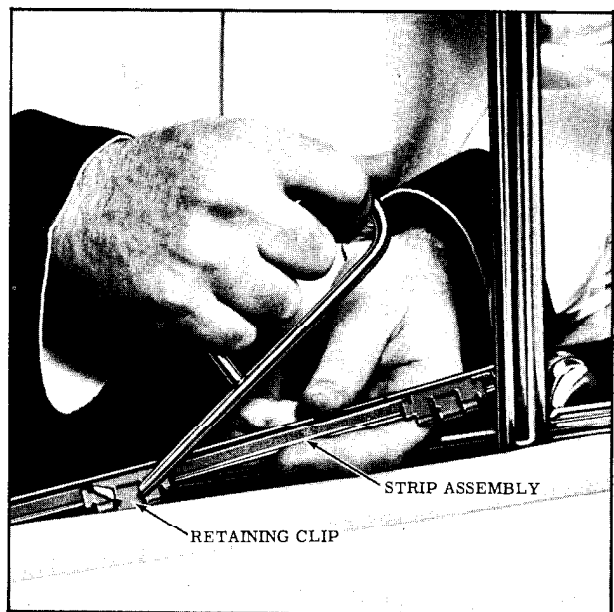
Door Glass Run Channel Outer Strip Assembly -- Inner Typical
